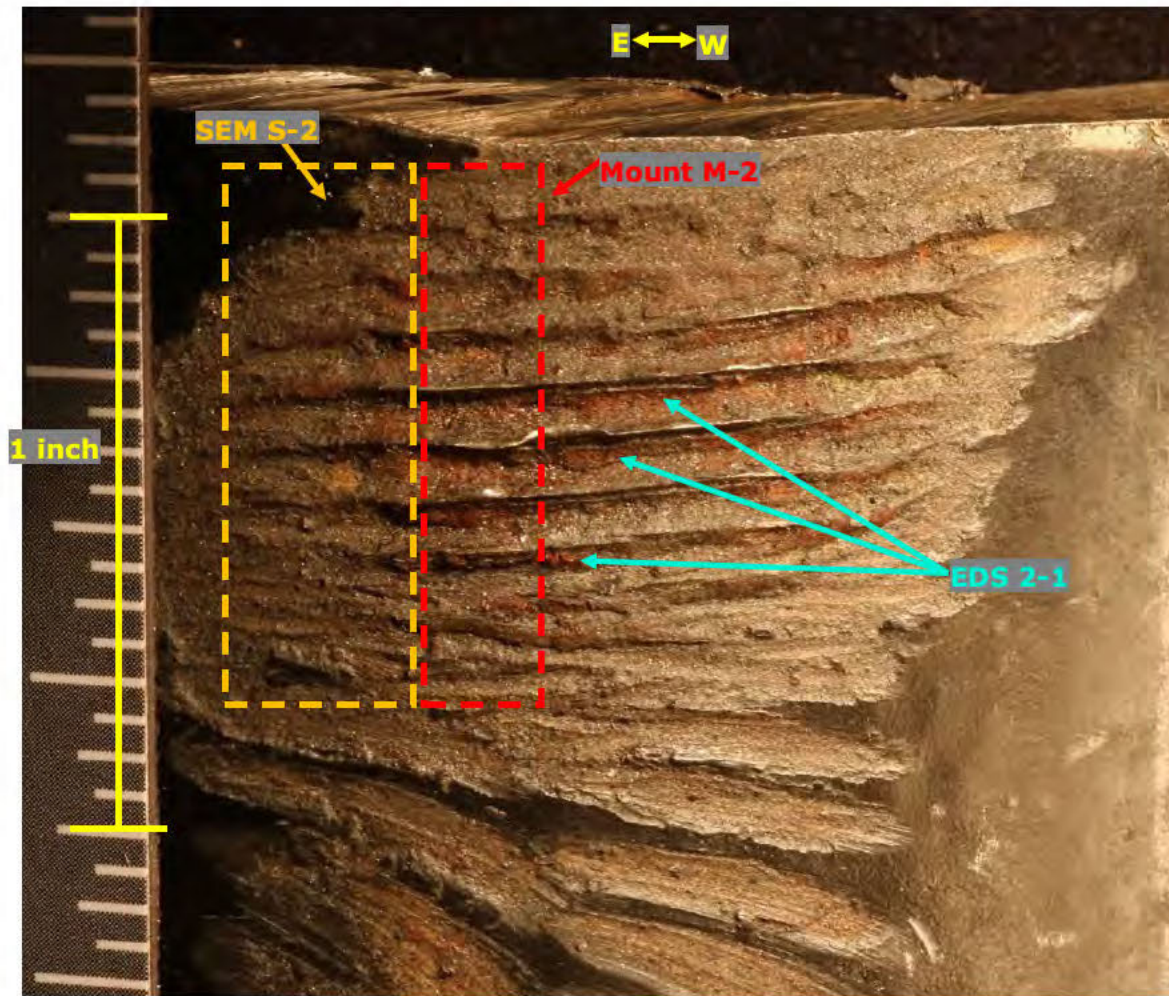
Close-up photograph of Anomaly 2 on OD surface of West Sleeve Ring (North side of assembly), and the locations of Mount M-2, EDS 2-1 and SEM-2. Location shown in Figure 3. Ruler for reference in inches.
